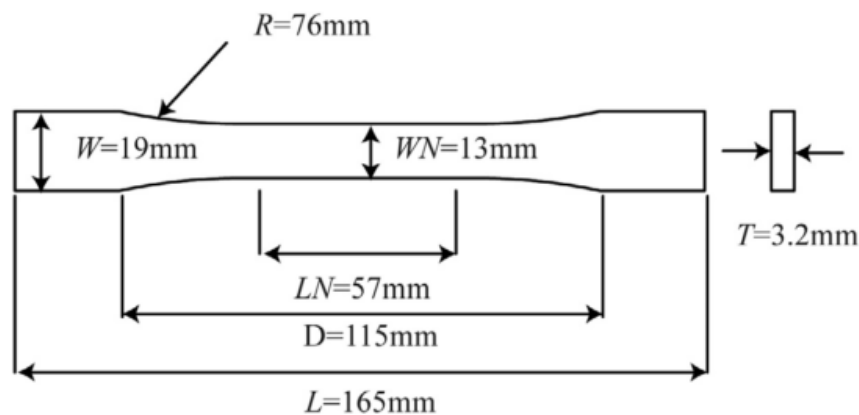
Dimensions and geometry of the 3D printed specimens for tensile testing. The dimensions shown correspond to those recommended by the ASTM D638-13 standard for a Type I specimen. [2]
